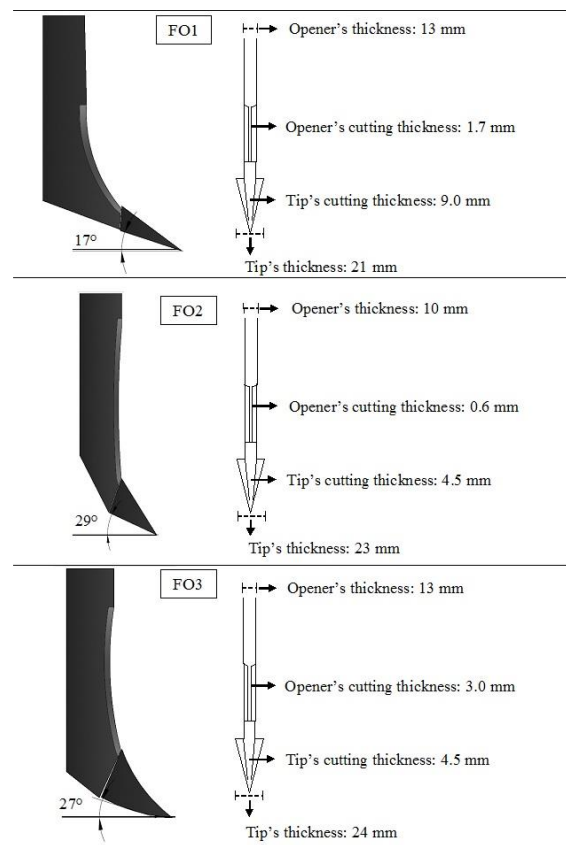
Characteristics and dimensions of hoe-type furrow openers, with side view (rake angle) and frontal view (dimensions).
